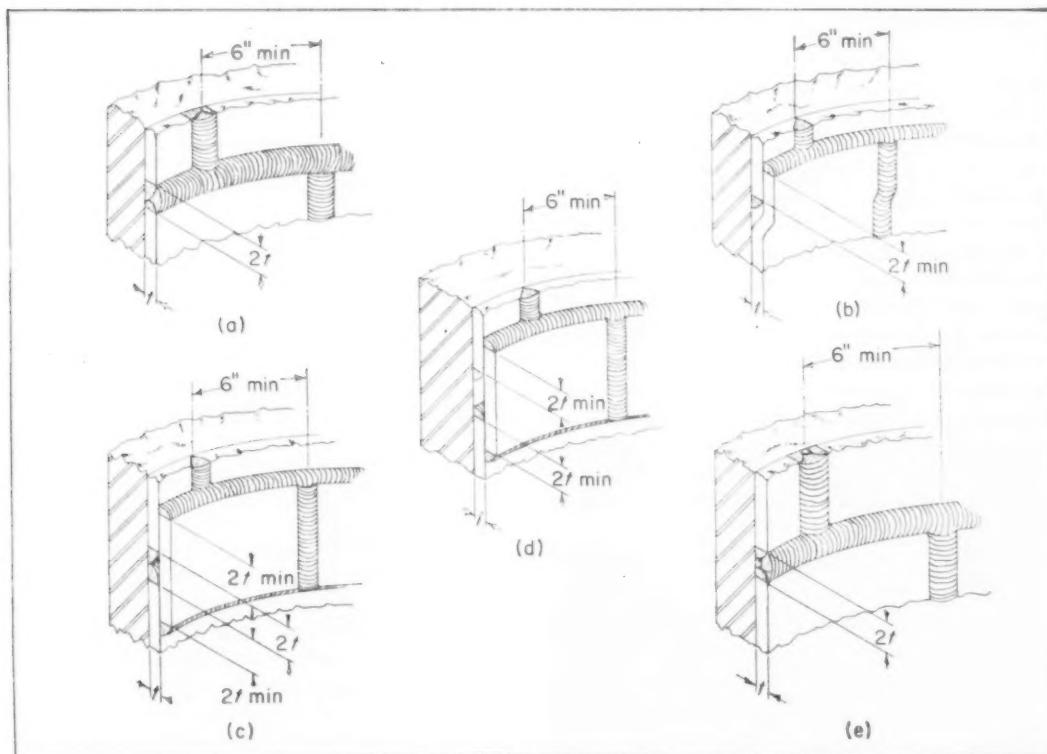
Types of welds in fabricating superalloy lined vessels. Contamination of the weld bead by vessel
